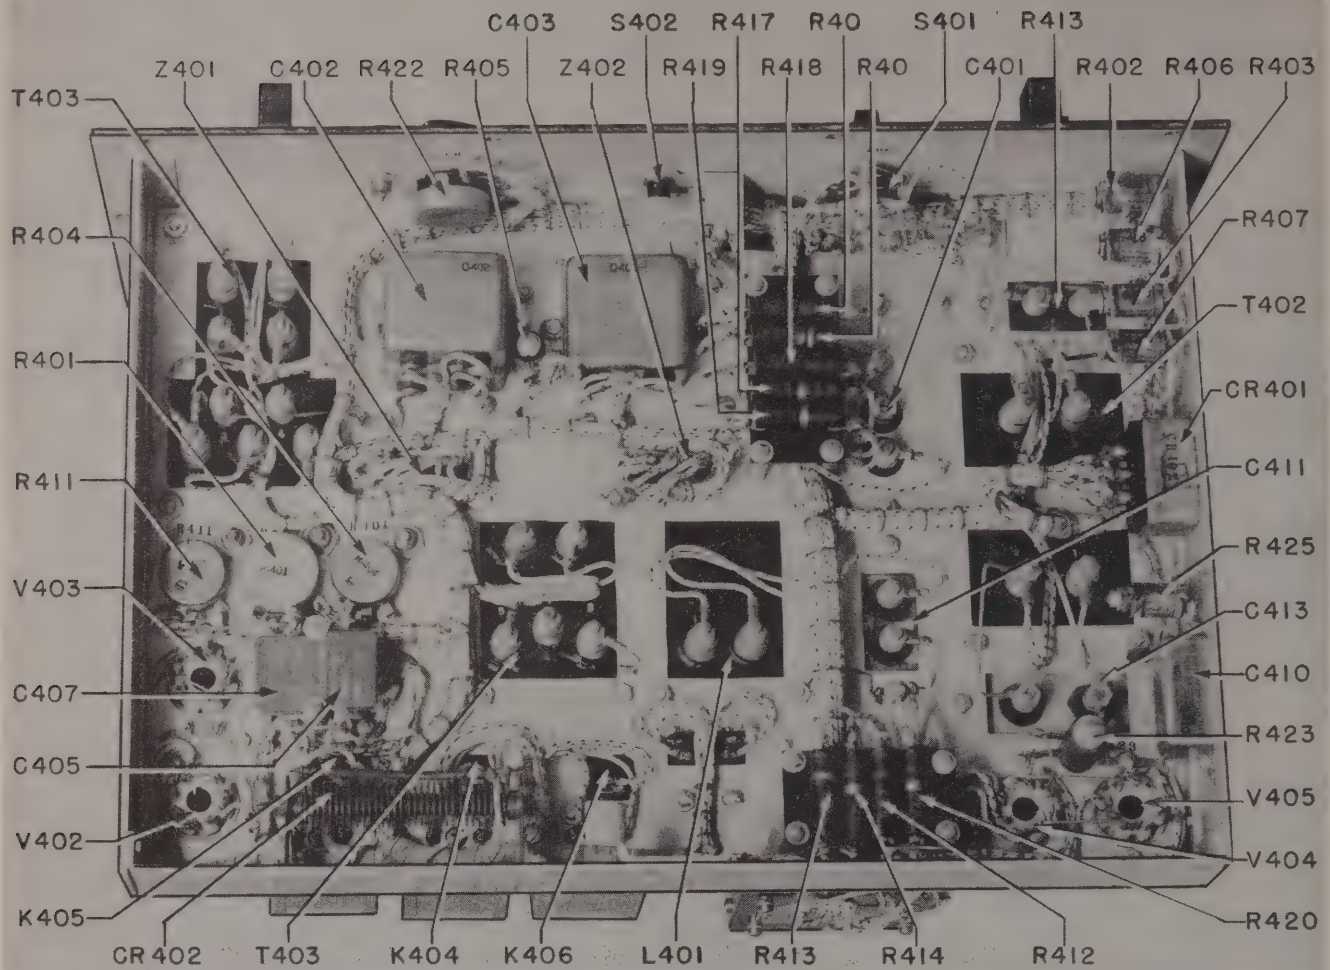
A. Indicator ID-70A/CRN-10—Bottom View of Chassis
